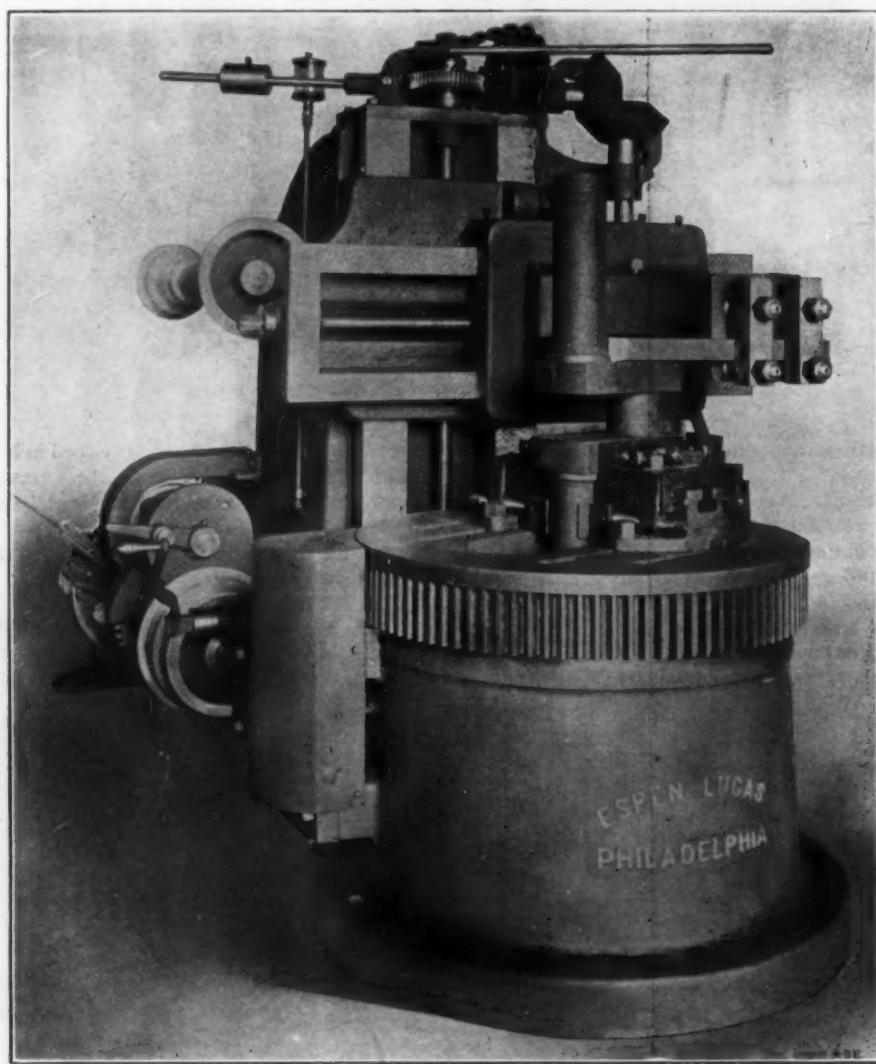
The Espen-Lucas Crank Shaft Machine, Showing the Setting for Turning the Outside of the Cranks.
